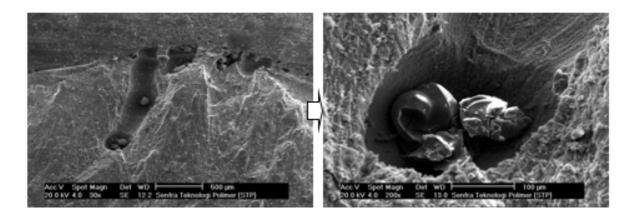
SEM fractographs of surface fracture obtained from the leak area of the weld joint between the header and the side bar/parting sheet.
